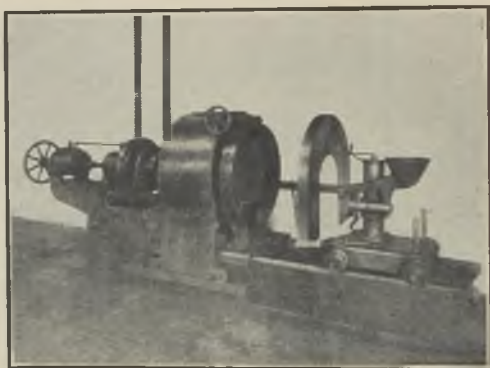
A MACHINE USED FOR CYLINDER LINERS.
